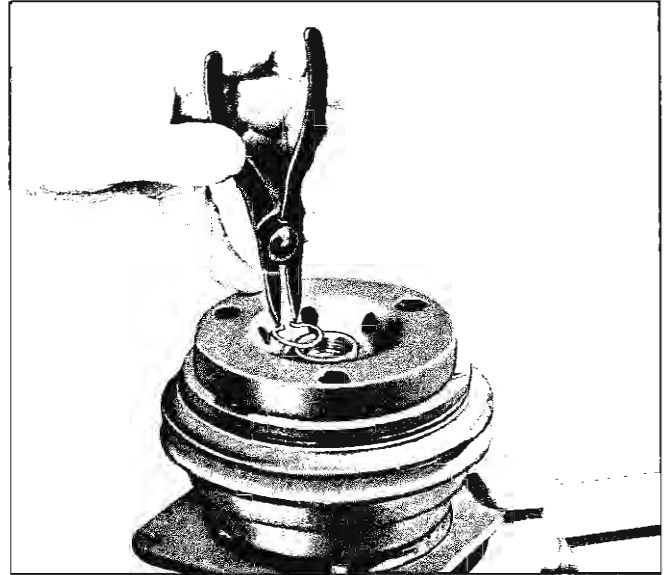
Removing Pulley and Bearing Assembly Retainer Ring
